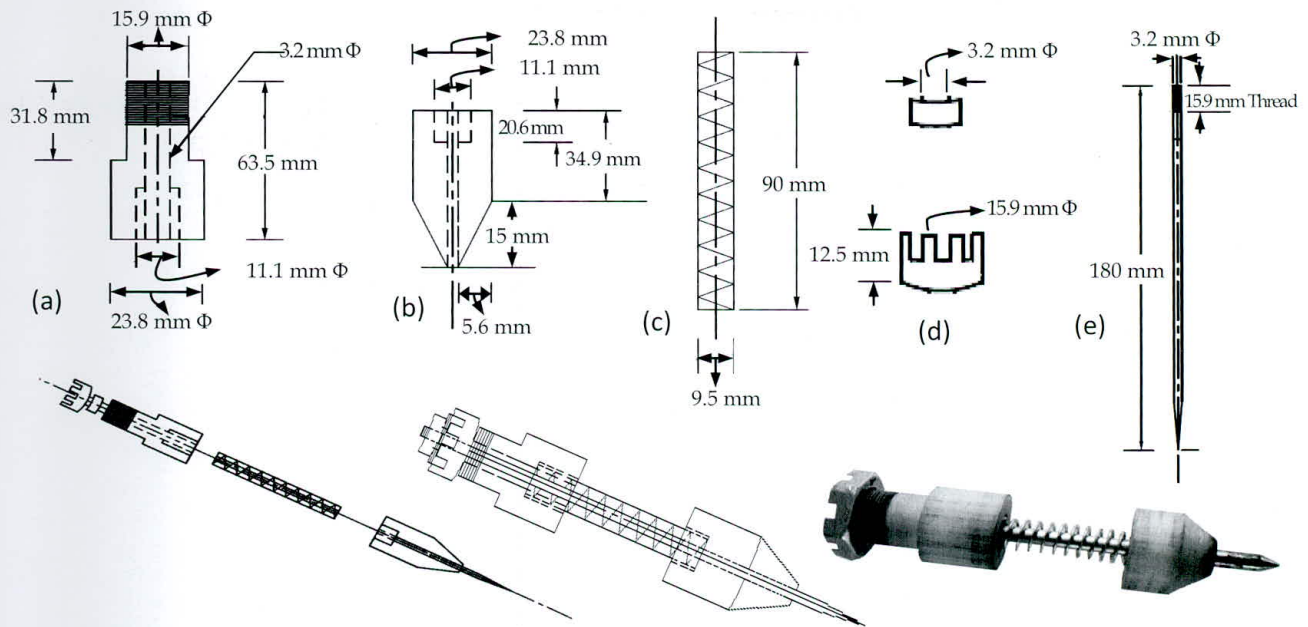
(a) Collar (b) Tail (c) Spring (d) Nuts (e) Probe (f) Assembly Drawing (g) 2D View (h) Pictorial View of Probe
